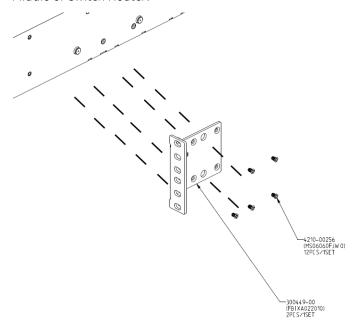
Attaching a Short Mounting Bracket (Ear): Middle of Switch Router
